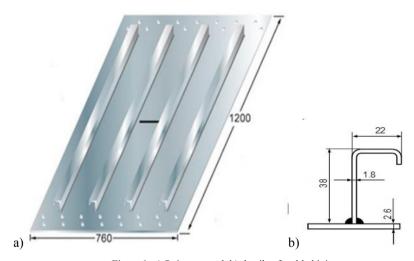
a) Stringer panel, b) details of welded joint
